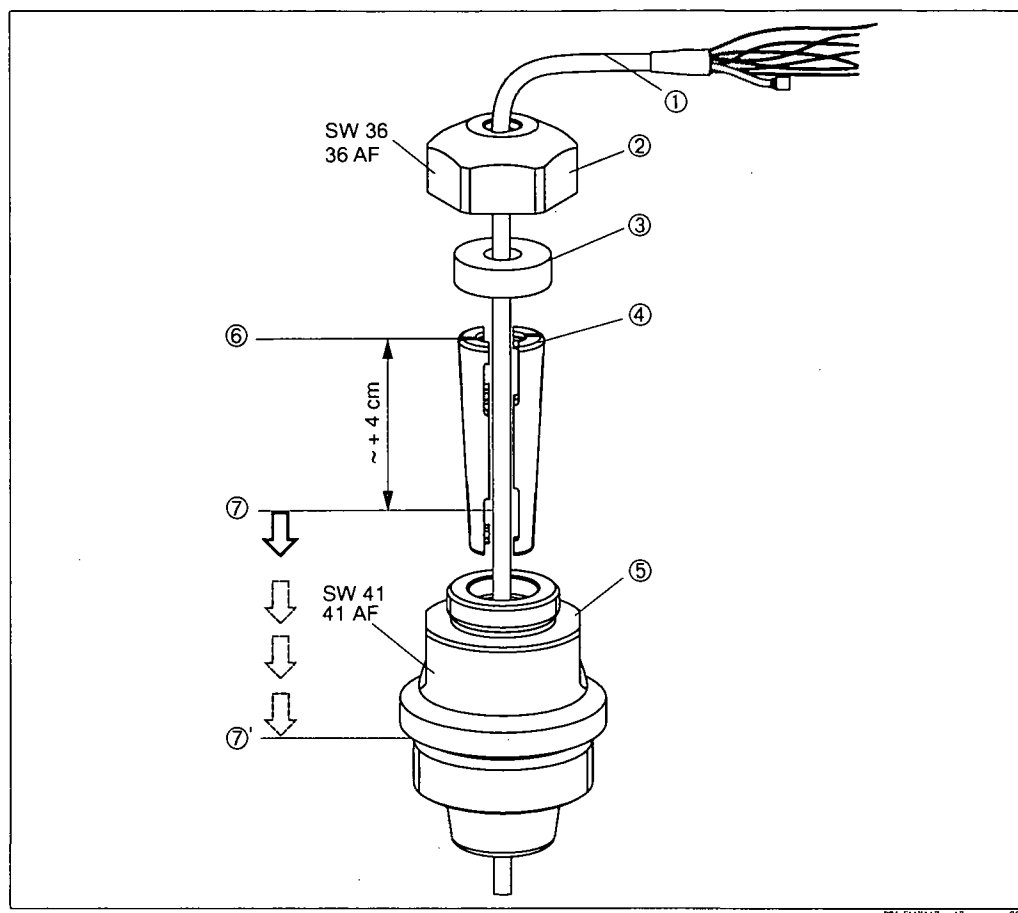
Installing the Waterpilot FMX167 with cable mounting screw, here depicted with G 1 1/2 thread
